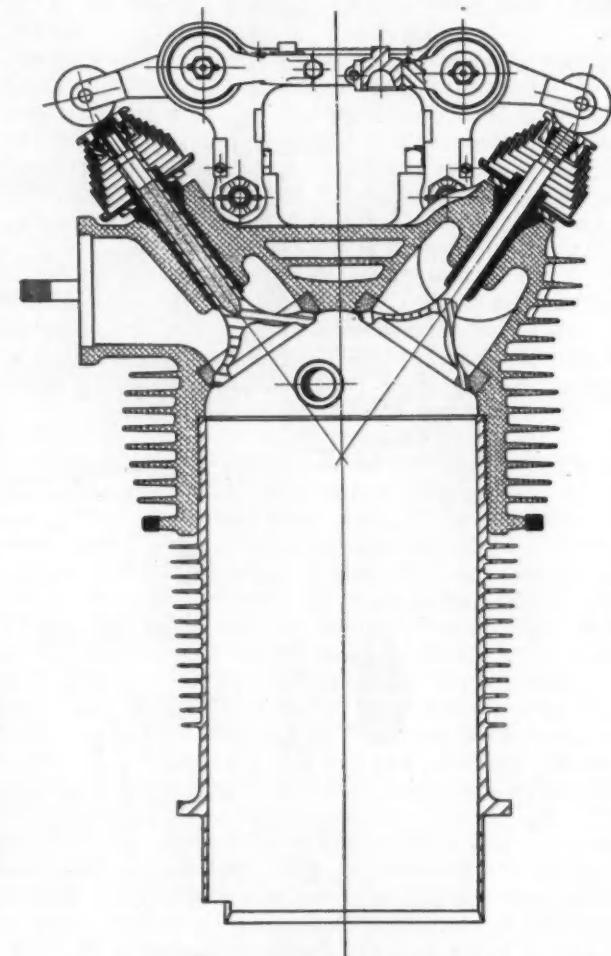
PRESENT FORM OF THE TYPE J CYLINDER
